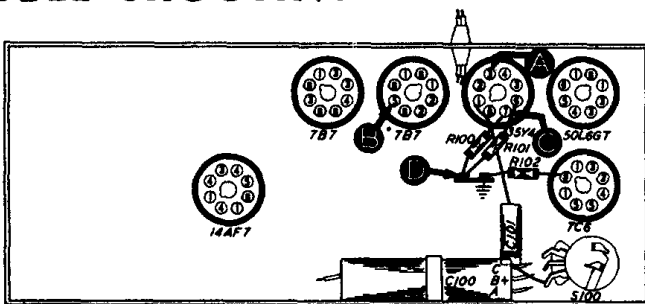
BOTTOM VIEW, SHOWING SECTION 1 TEST POINTS
